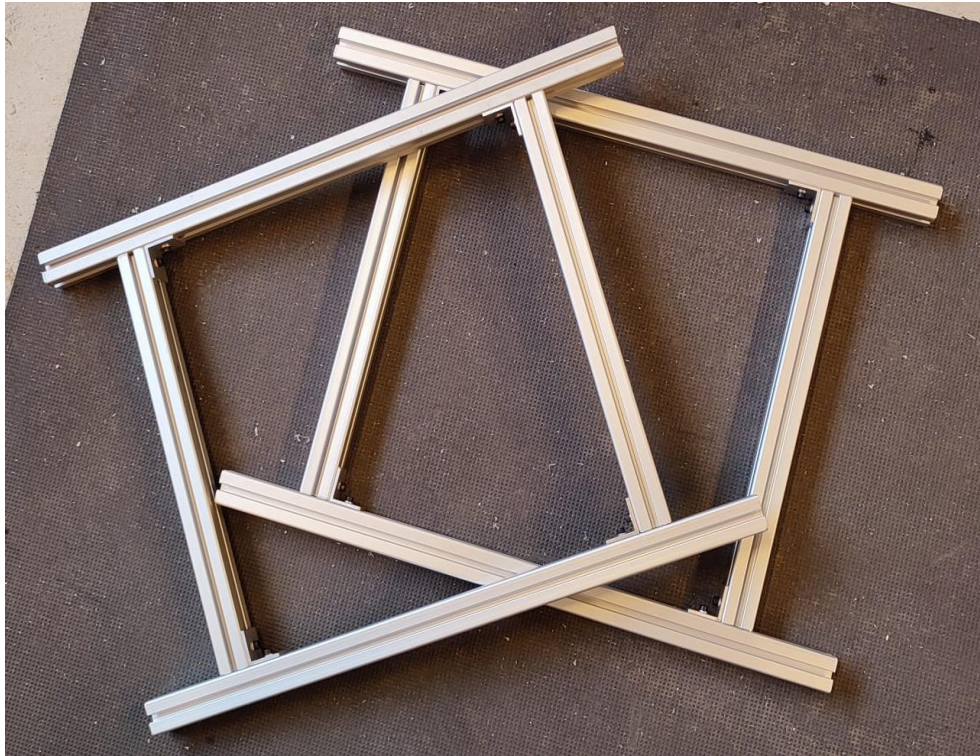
14 RAS frame under construction, fastened with bolts and nuts.
